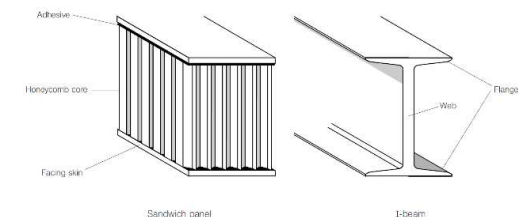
shows the construction of a sandwich panel compared to an I-beam.
